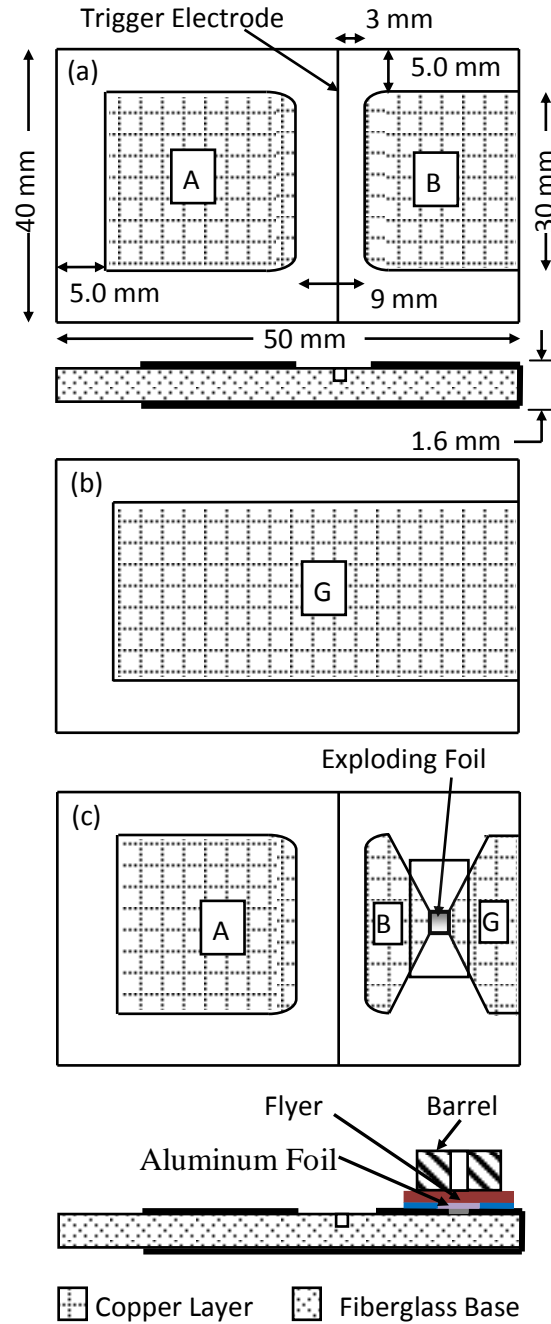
Schematic view of PCB based rail gap switch and exploding foil assembly.
